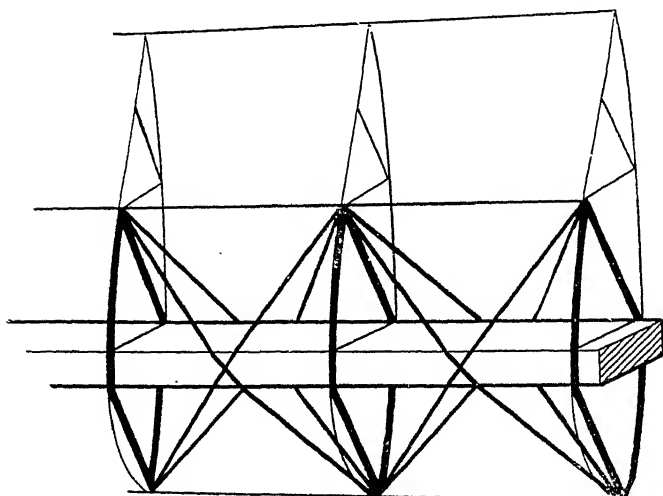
A TYPICAL SINGLE SPAR CONSTRUCTION FOR THE CANTILEVER WINGS OF MONOPLANES.
